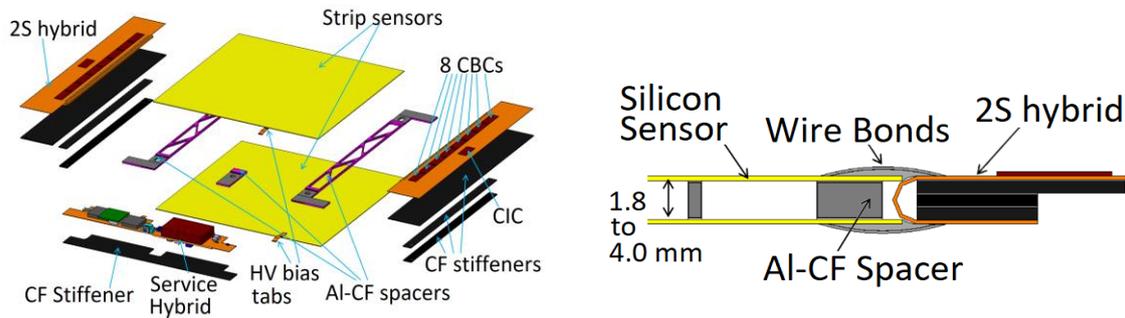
An exploded view of the 2S module concept (left), and a cross-section view of the interconnection between a folded front-end hybrid and both sensors (right).
